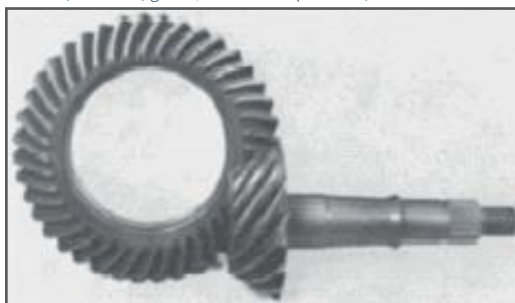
Steering gears made of class 4 nodular ADI, machined in the ferritic state, with a hardness of 160 HB.
